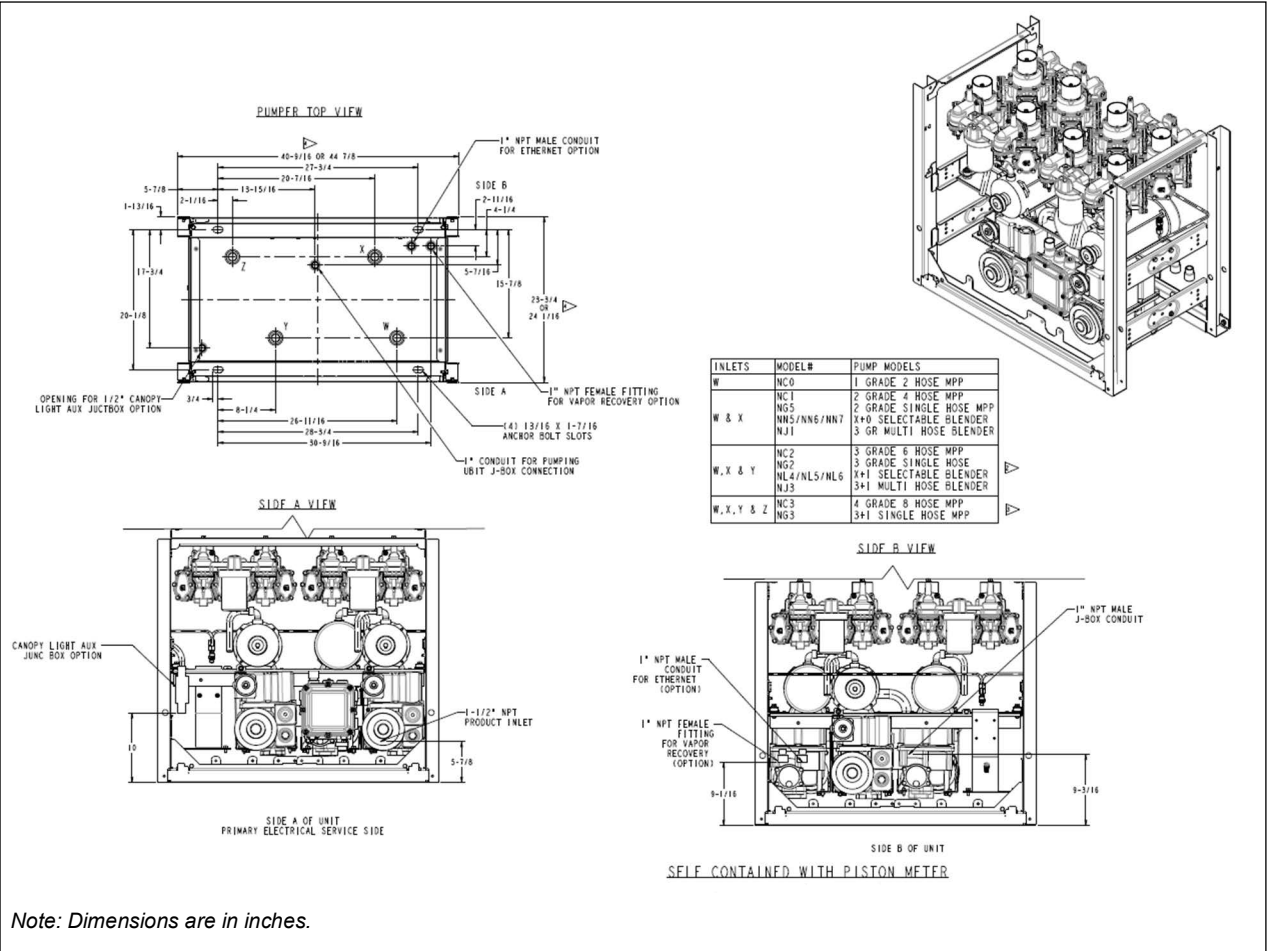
Encore Foundation Diagrams: 4 of 9 (Electrical Conduit Layout)
